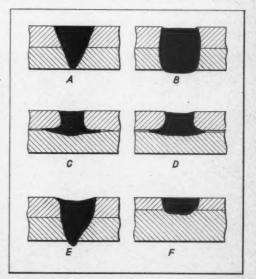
Diagrams showing the penetrations obtained with inert-gas tungsten-arc spot-welding under varying conditions of electrode form and welding pressure
